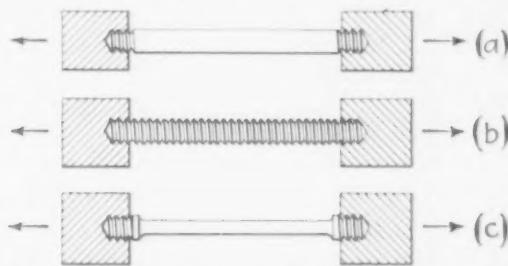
THREE TYPES OF SPECIMEN TESTED IN TENSILE IMPACT:—Specimen (a) required much less energy to fracture than either specimen (b) or specimen (c).
